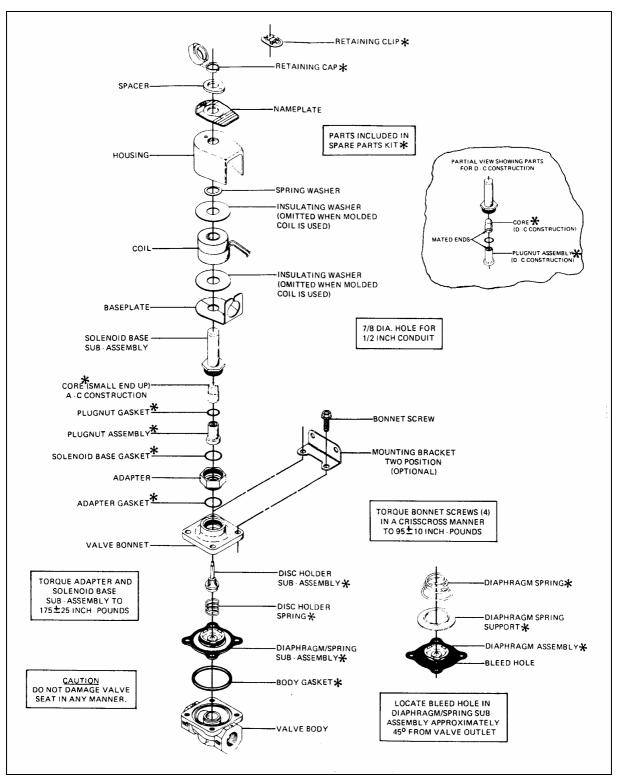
DRIVER'S WATER SOLENOID VALVE
